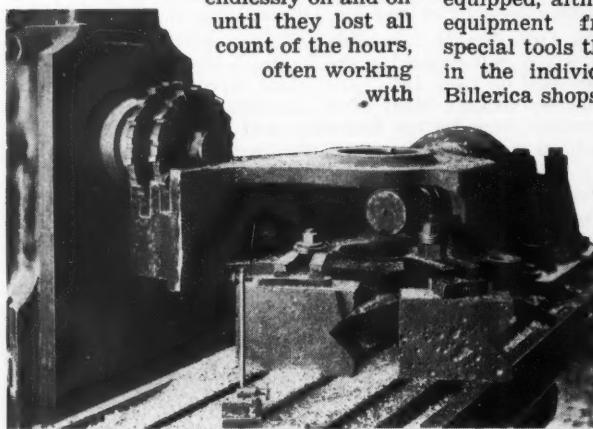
This milling operation is a part of the process of reconditioning a multi-wear crosshead. When the contacting surfaces became badly worn, they are built up with block tin and remachined to size.
